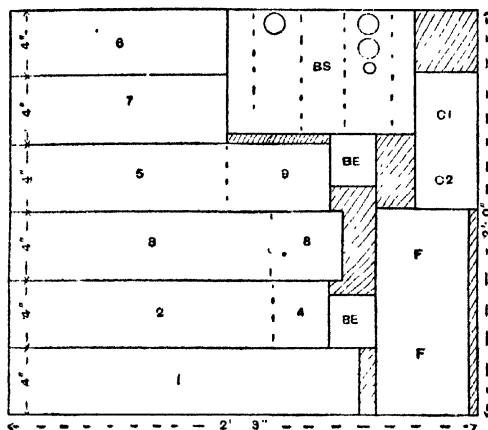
Laying out Copper Sheet for Boiler, Pipes, etc.
